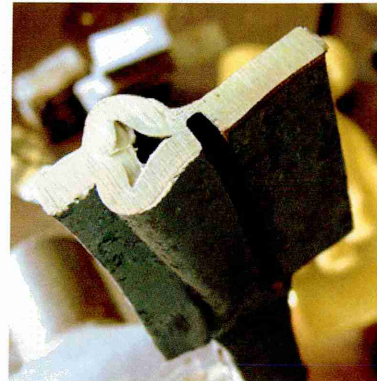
end has been removed from billet showing the collapse. The flat piece to the right was removed and used to make the final blade. [KH]
